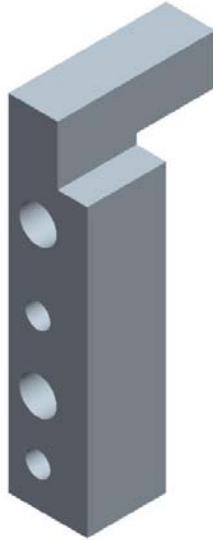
Linear Cam Support (Isometric View ProEngineer)
